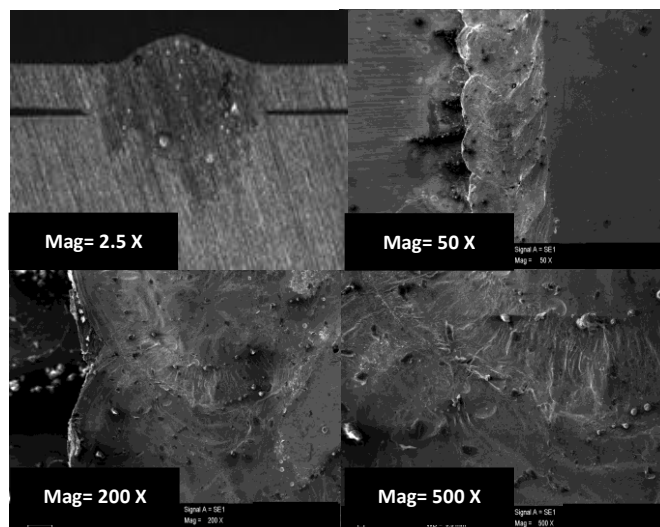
T11 Sample 2.5x-50x-200x-500x Magnified Weld Penetration Zone
